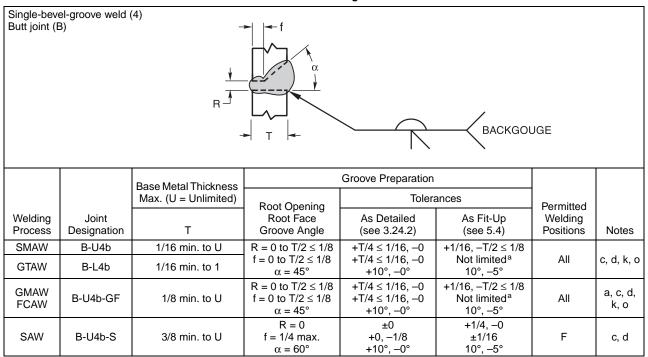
(Continued)—Prequalified CJP Groove Welded Joints—Nontubular (see 3.24.1)
